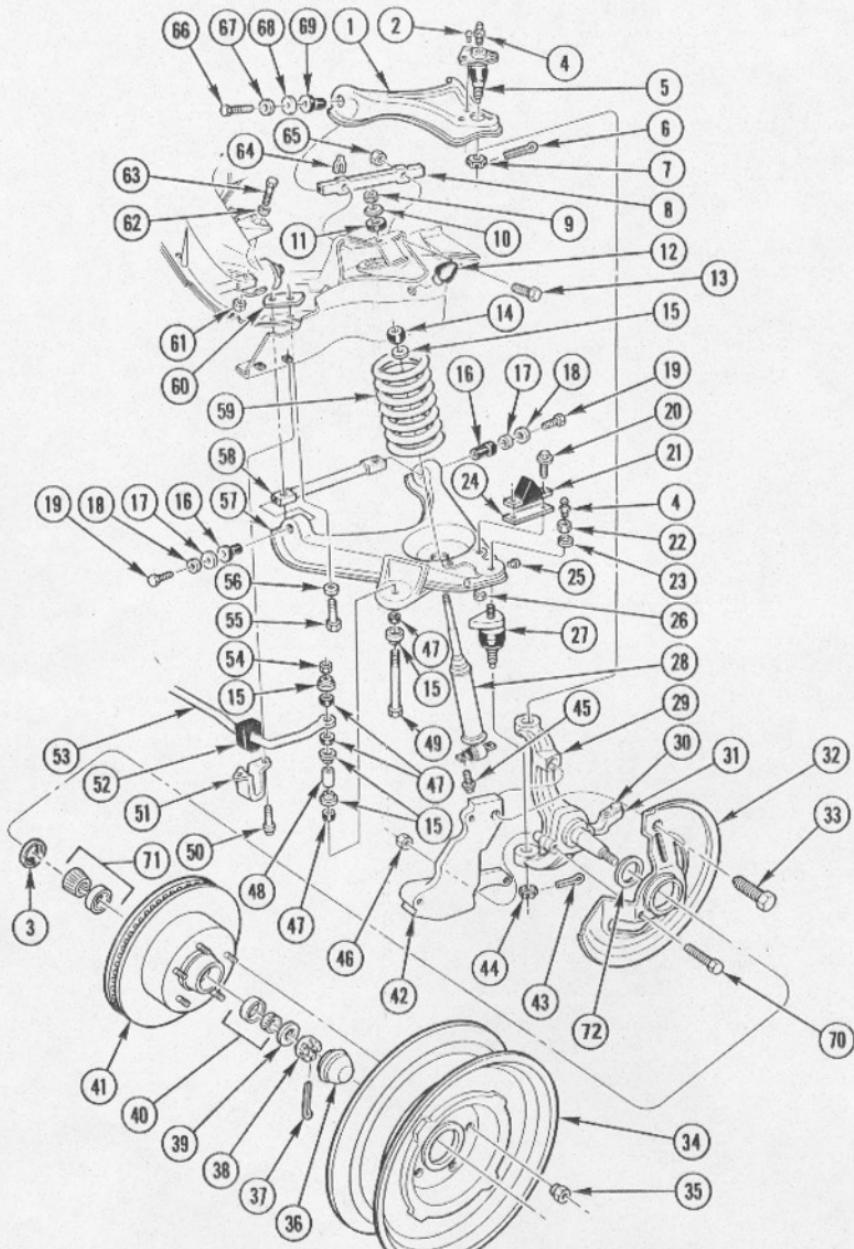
1965-82 Corvette Front Suspension (Typical)
